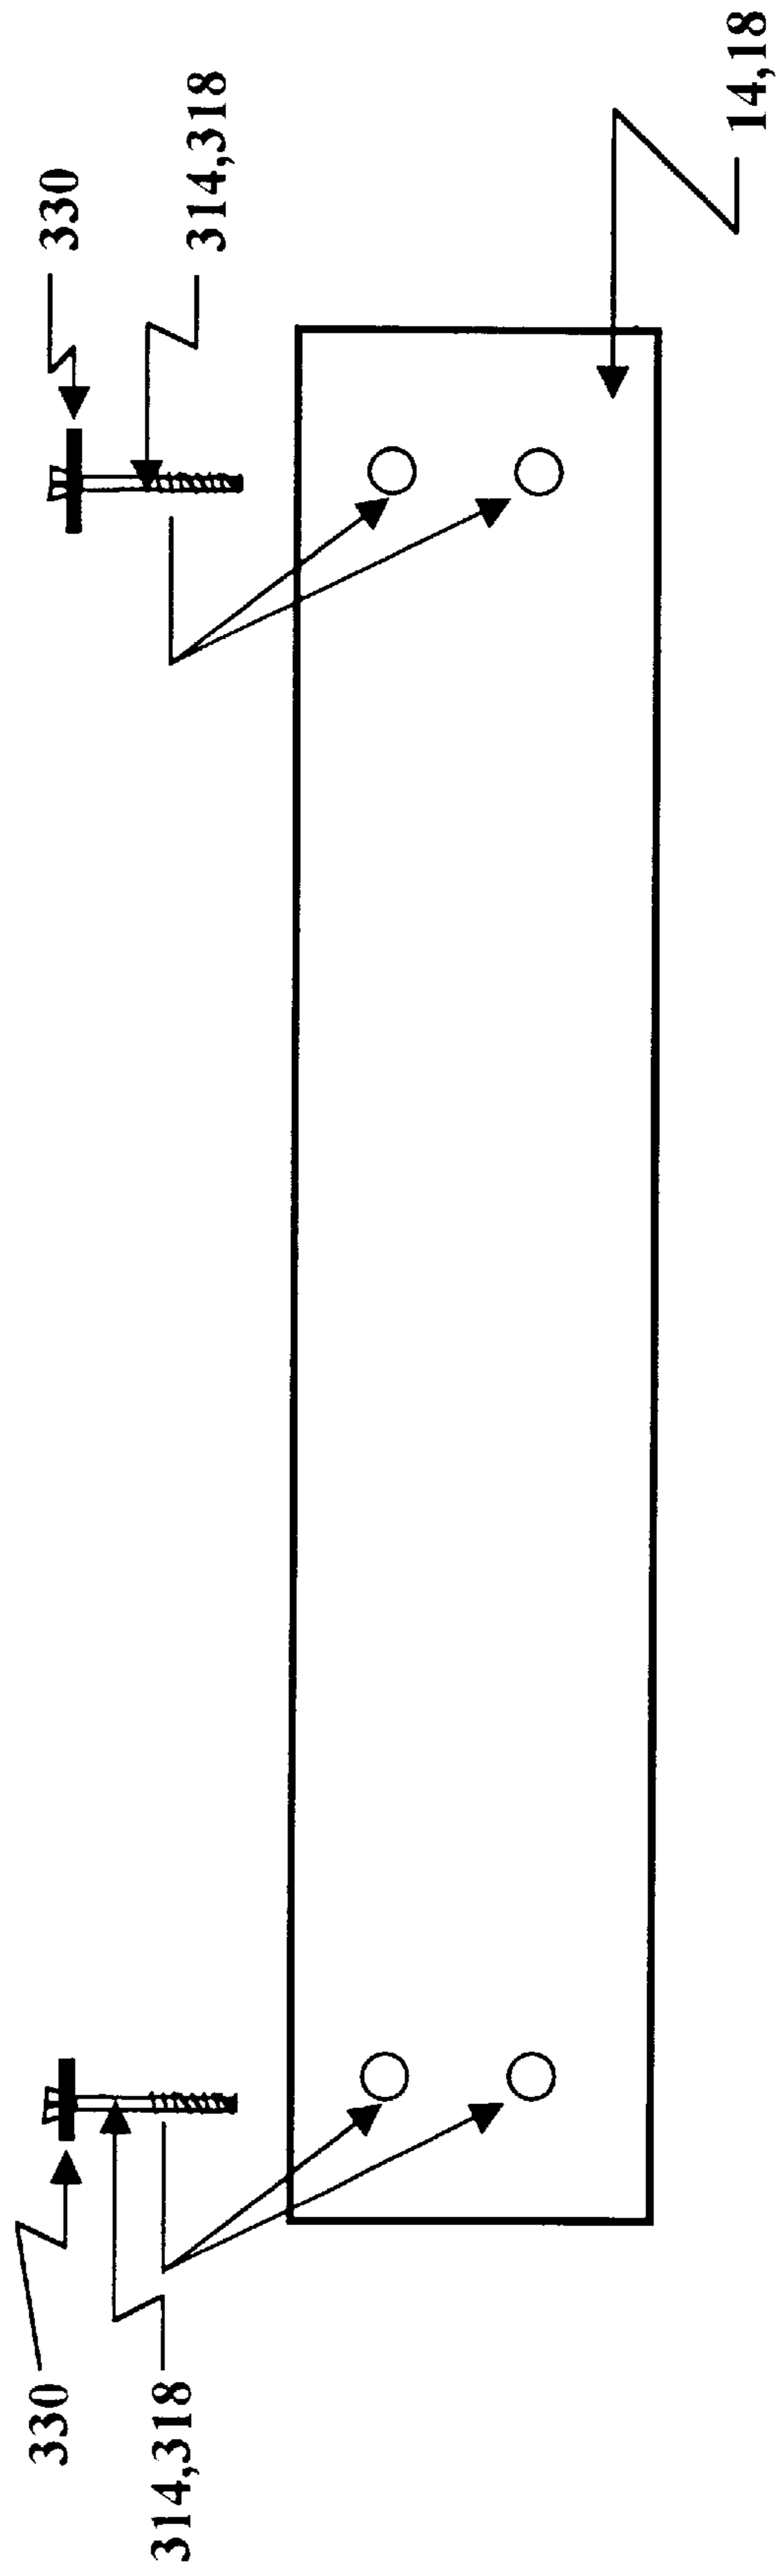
TOP VIEW OF 10, THE ASSEMBLED COMPOSITE MODULAR UNIT
